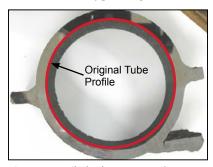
Failed tube cross-section showing tube distortion and attachment damage
